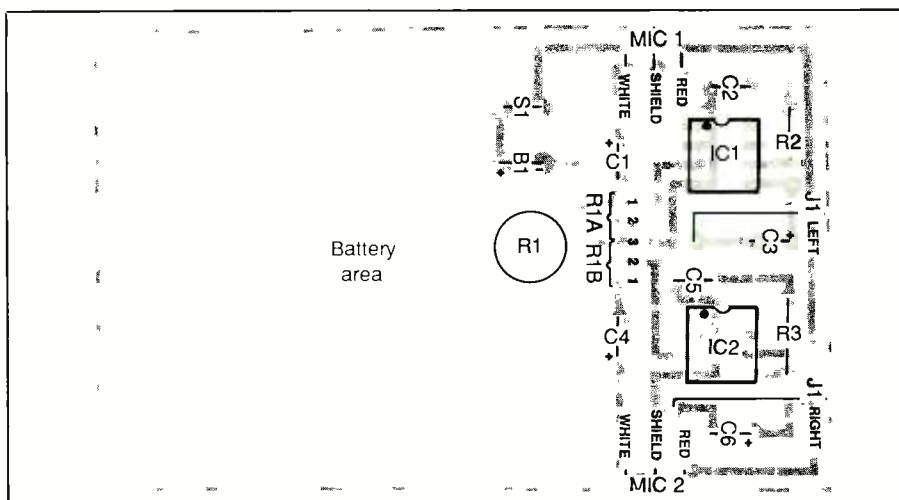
The wiring guide for the pc board. Use this arrangement for perforated-board layout as well.
